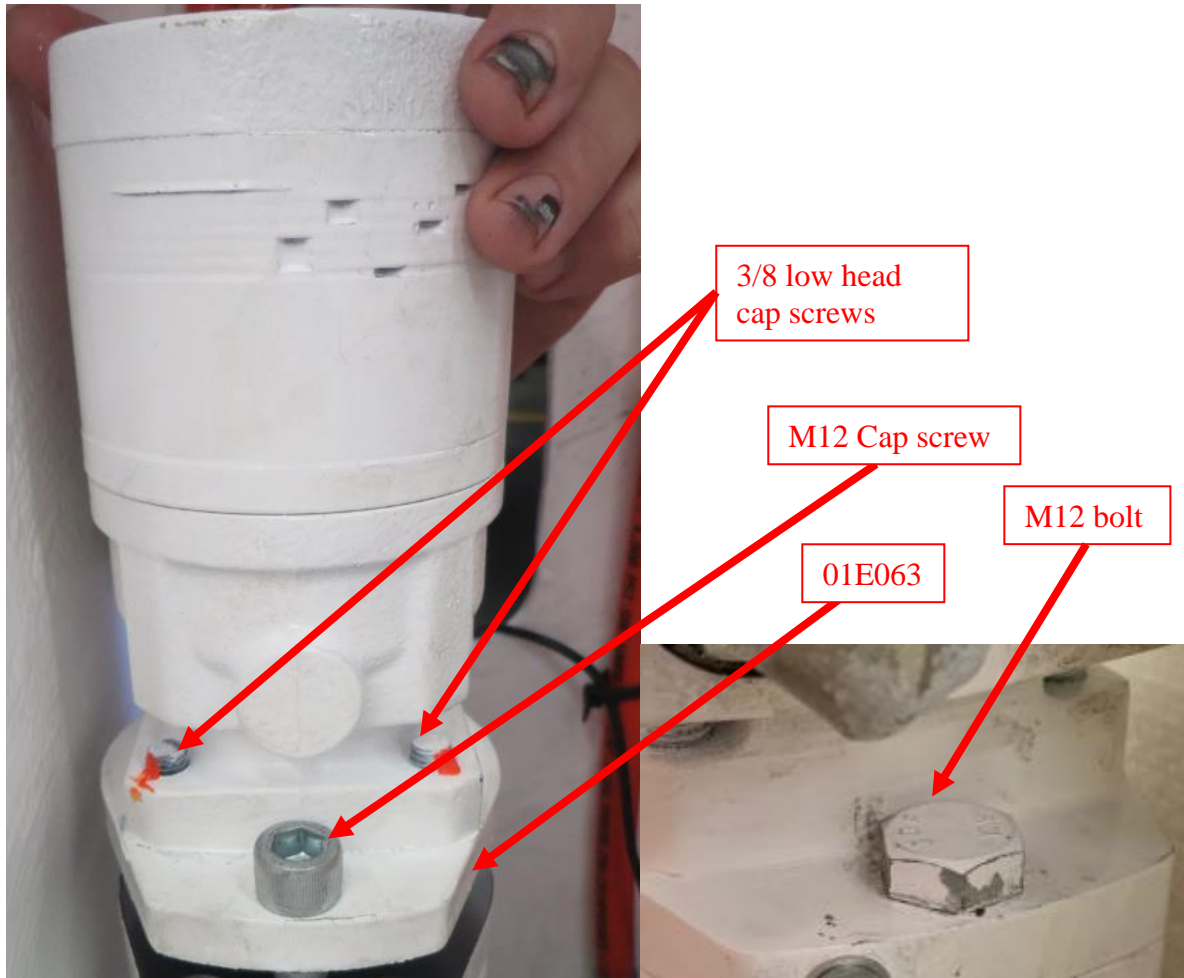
Parker TE165 motor assembled with 01E063 plate
